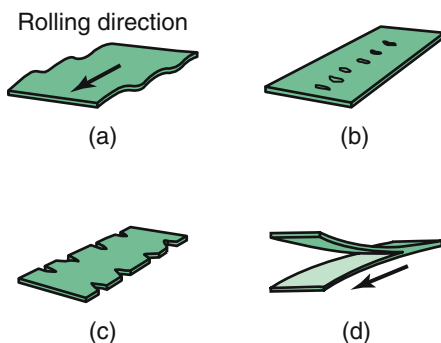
Schematic illustration of typical defects in flat rolling: (a) wavy edges; (b) zipper cracks in the center of the strip; (c) edge cracks; and (d) alligatoring.
